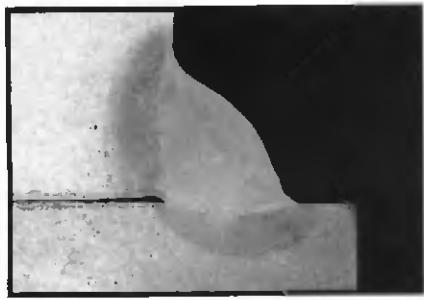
Section through an uphill vertical (3F) position fillet weld made using a stringer bead technique (6X).
